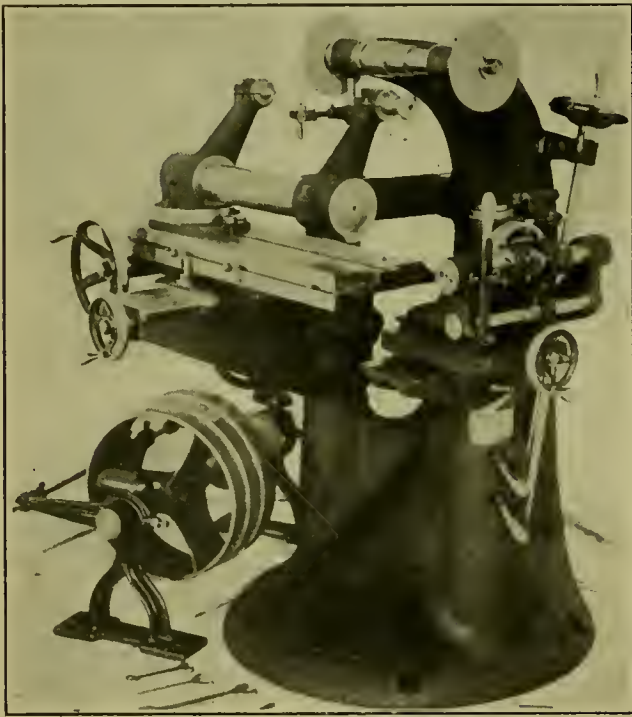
BECKER-BRAINARD CUTTER AND REAMER GRINDER.
